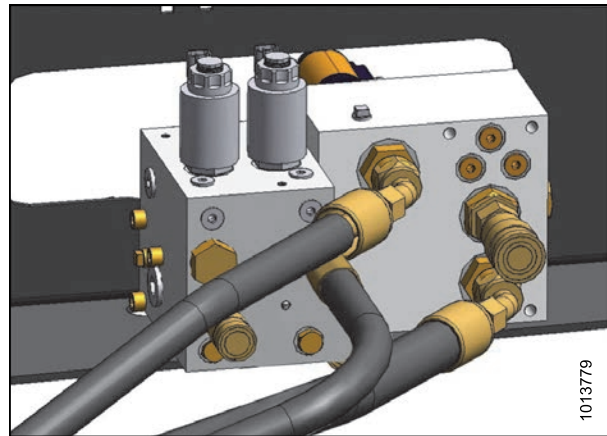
M150/M155/M155E4 without Reverser Valve
